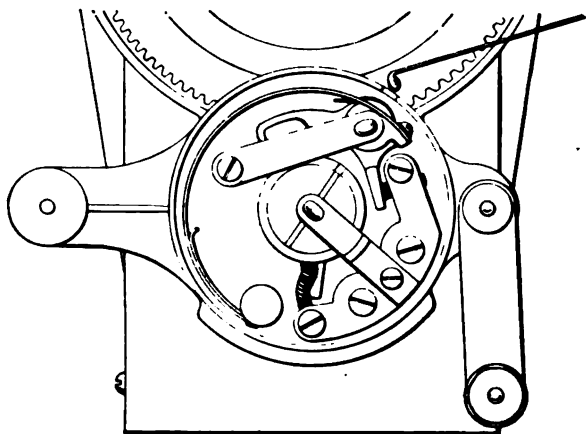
Interior view of breaker box on Dixie magneto, with cover removed
